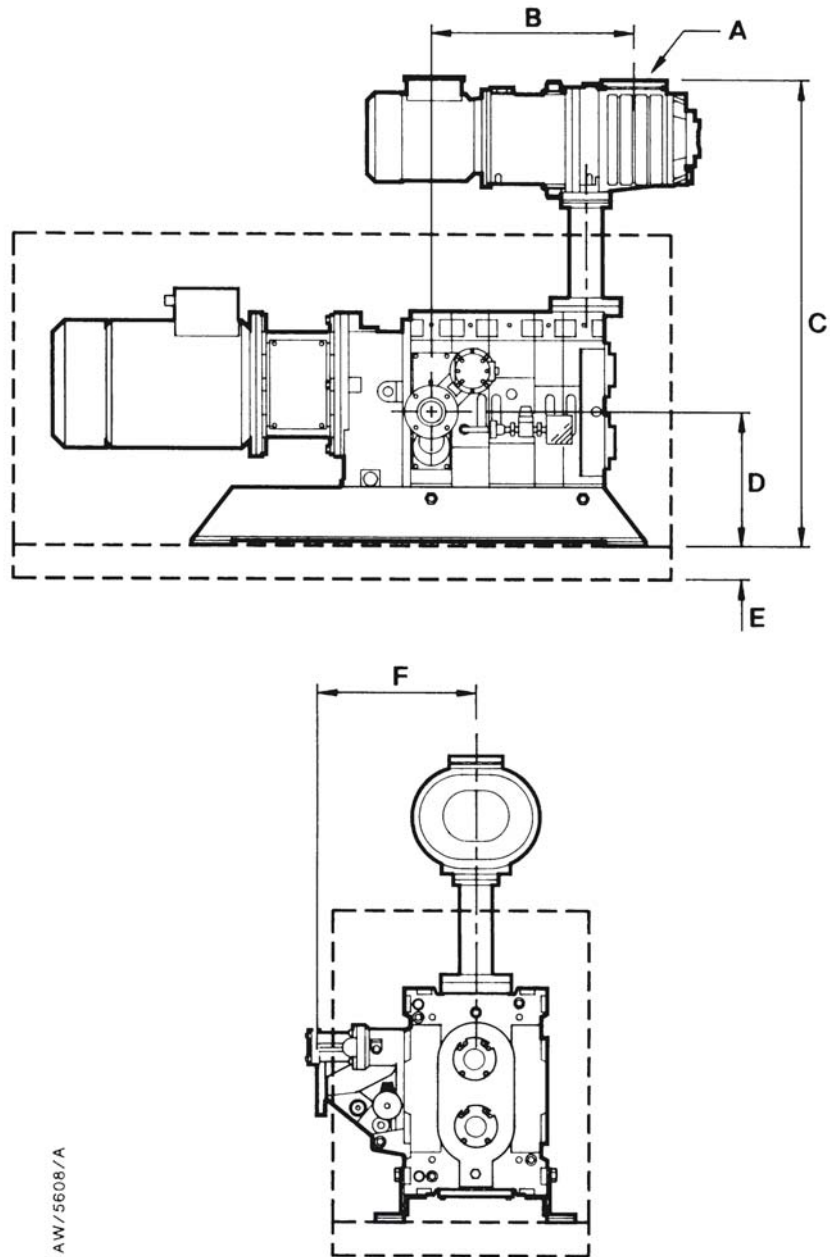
Dimensions of GV160-EH250/500/1200 combination pumping systems: refer to Table
